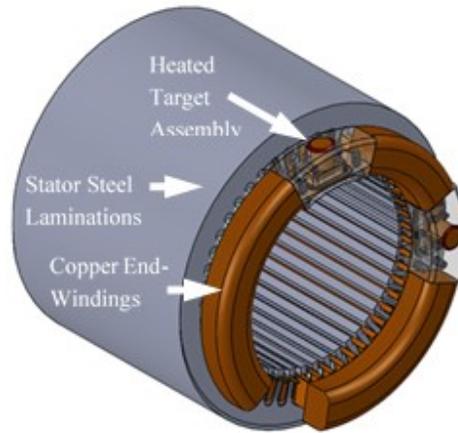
Electric machine with mounted heat target assembly within the end-windings (Computer-aided design (CAD) model by Emily Cousineau, NREL)
